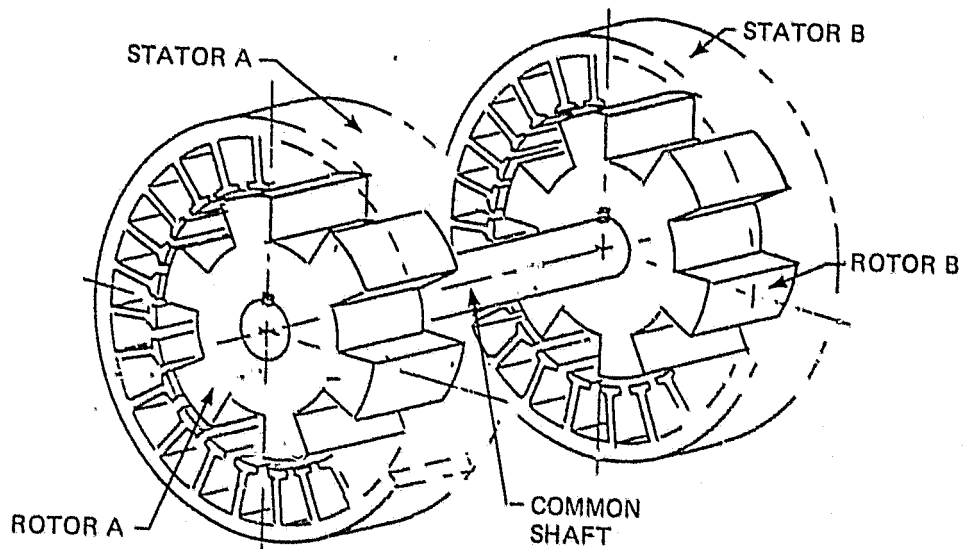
Cutaway View of Stator and Rotor Alignment
